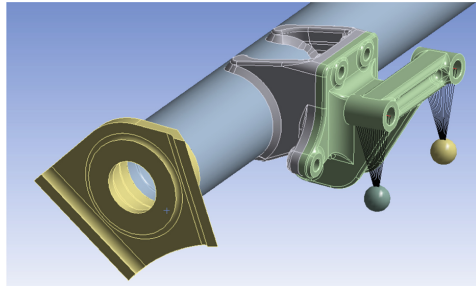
Model of the brake support, the braking bar and the welded bracket.
